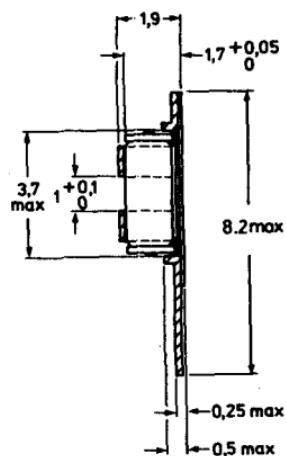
Cross-sectional view of bandolier with SOD-80 devices.
